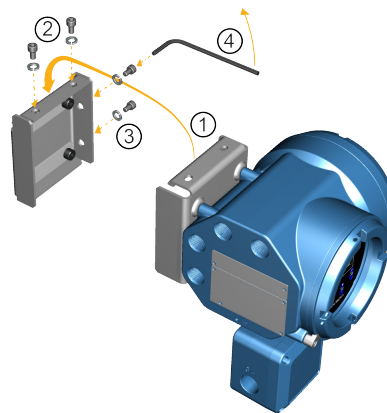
Wall-mounting bracket and dimensions for a stainless steel transmitter
